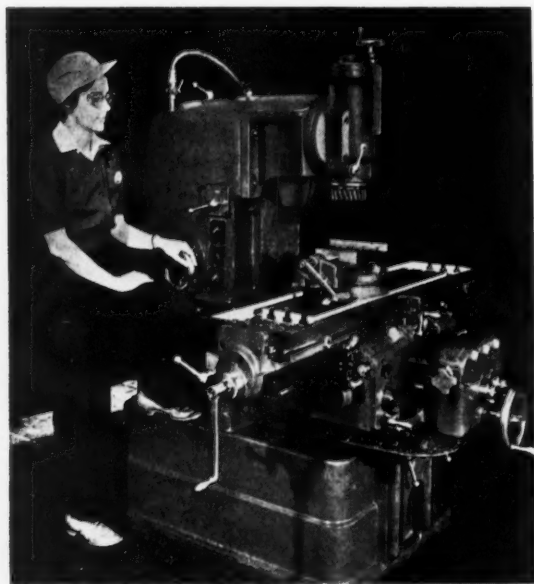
Lombard Universal Milling Machine Set up for Vertical Milling Operation
